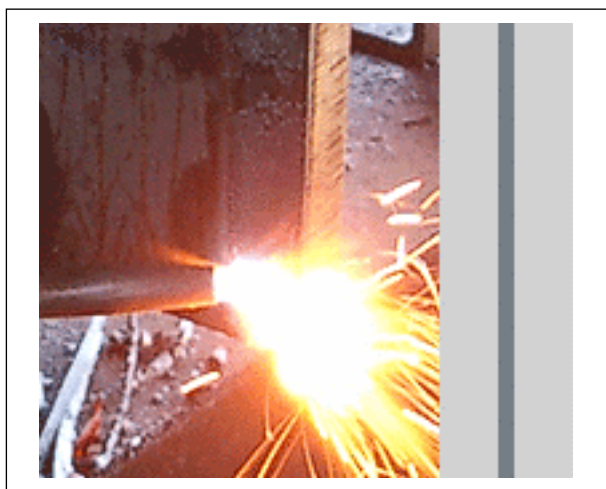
5-axes Oxyfuel beam coping machine designed for cutting I-beams, H-beams, channel, angle, rectangular tubes and flat-bars (Photo courtesy www.FICEP.it)
